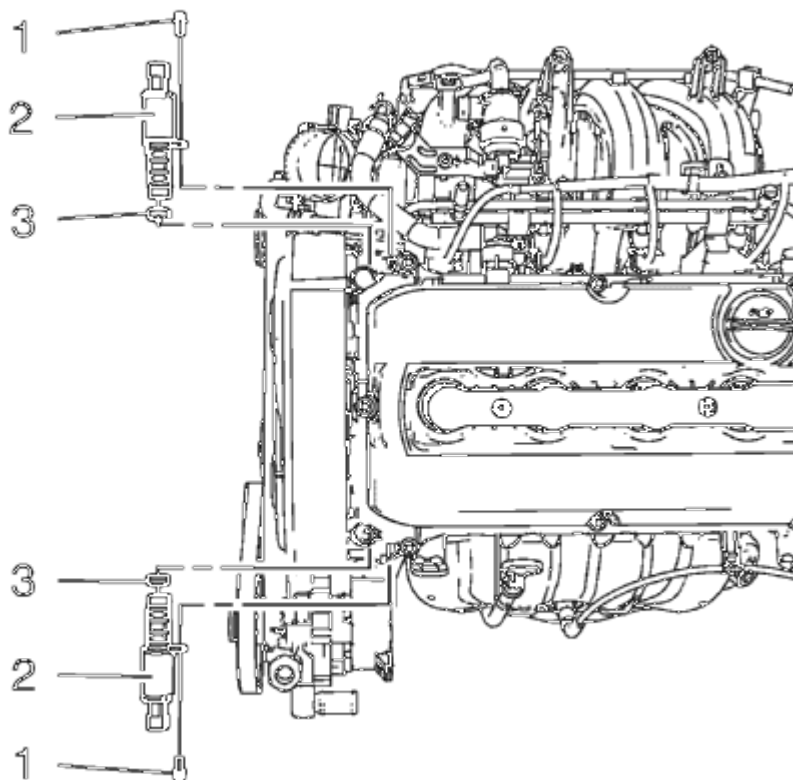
Camshaft Position Actuator Solenoid Valves, Bolts And Seals
